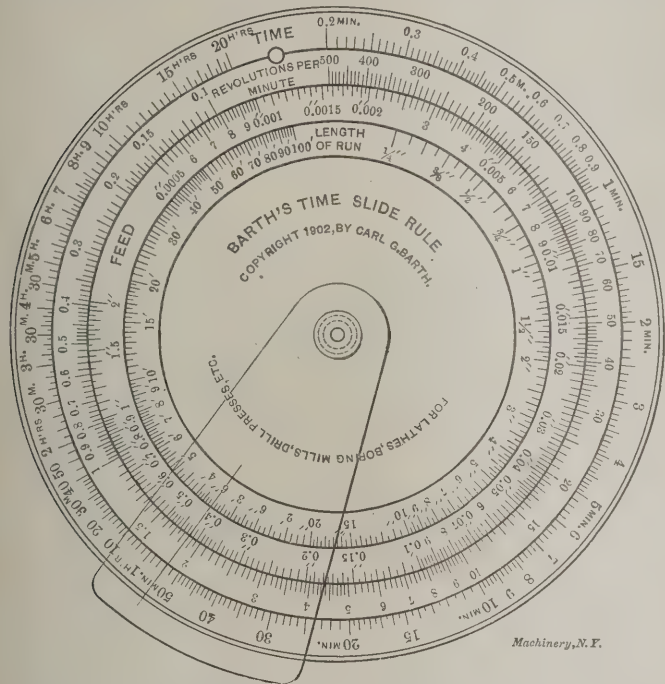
Barth's Time Slide Rule for Machine Shops, used in Connection with Lathe Slide Rule shown in Fig. 49.
